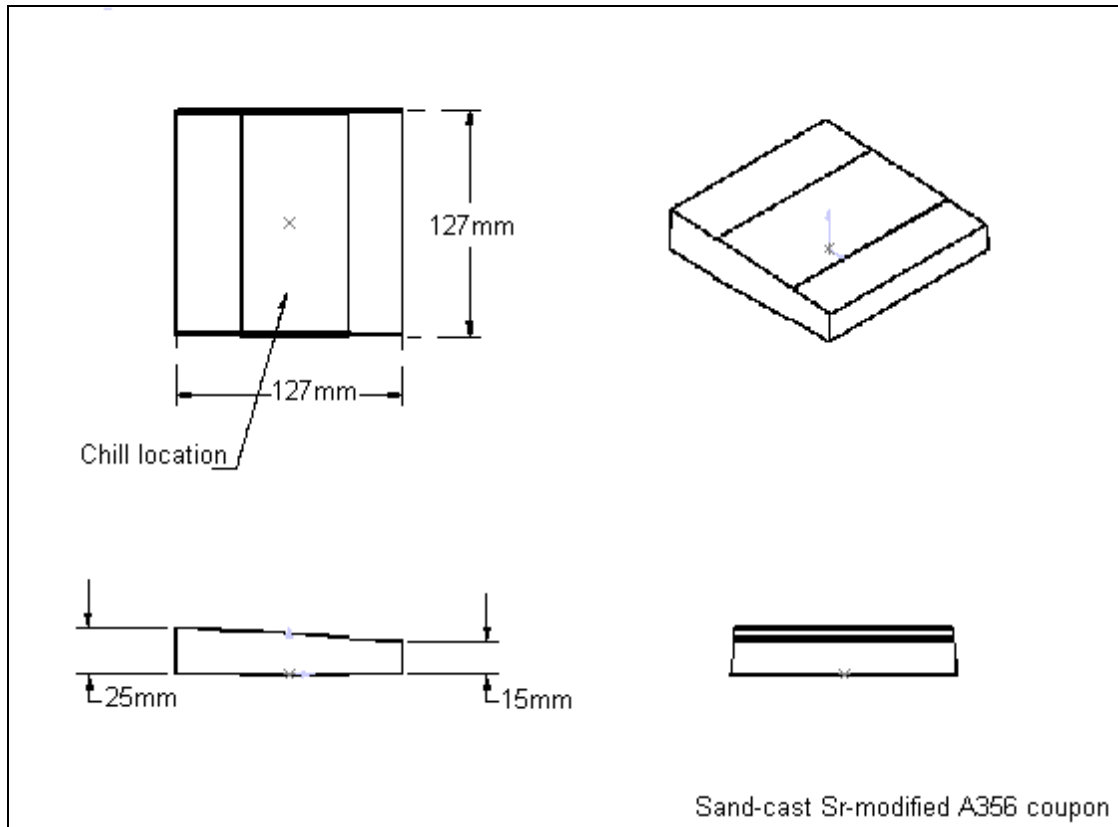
Size and geometry of sand-cast Sr-modified A356 experimental coupons. Each casting yielded five tensile/fatigue samples.
